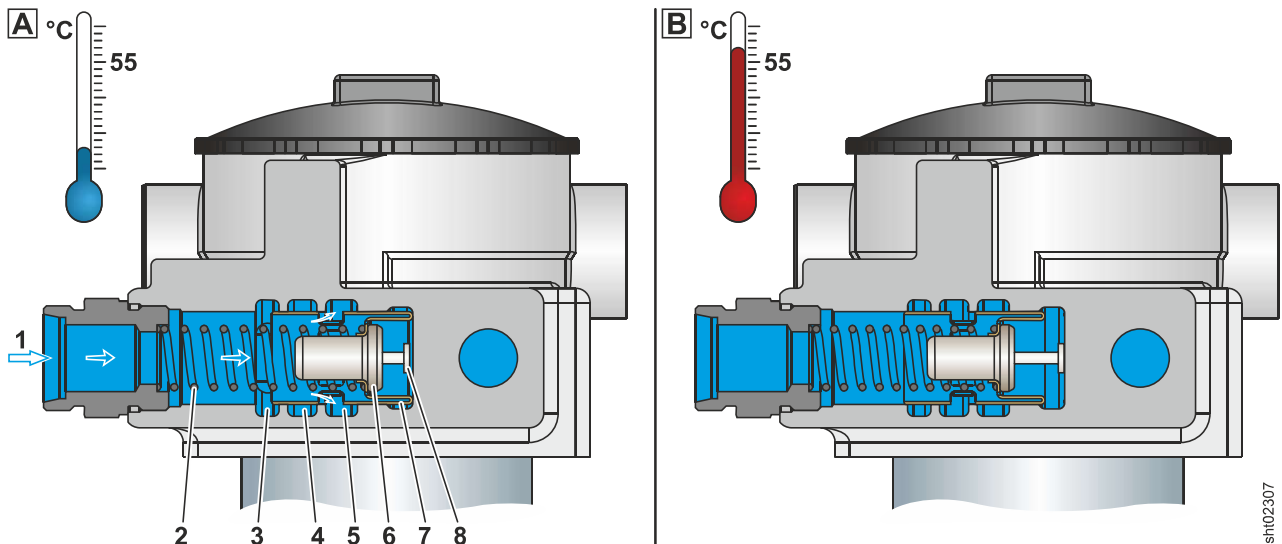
Temperature valve with cold hydraulic oil / temperature valve with hot hydraulic oil.
